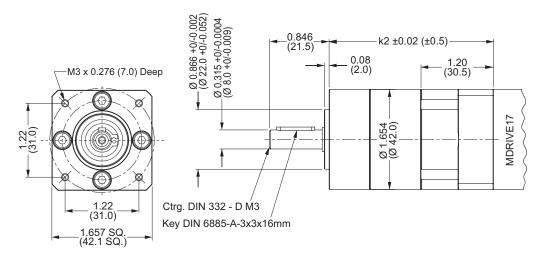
Planetary Gearbox Specifications for MDrive17Plus with NEMA Output Flange
